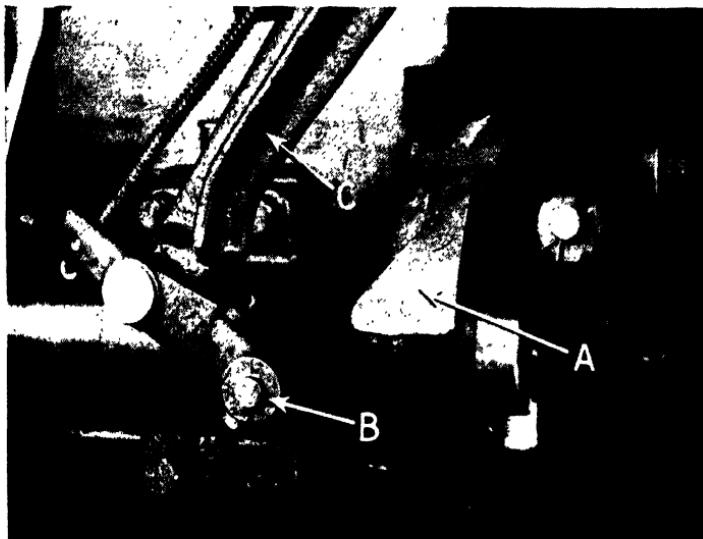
Guillotine paper cutter, showing nonrepeat device in the tripped-out position. (*Courtesy of Seybold Machine Company Division of the Harris-Seybold-Potter Company.*)
